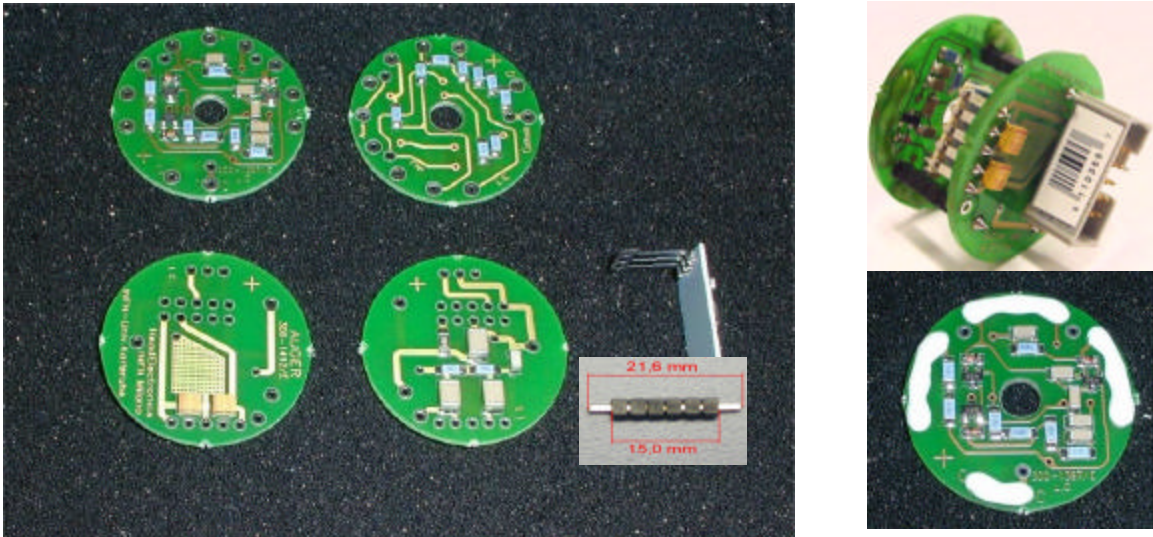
The Base PCB (upper side), the driver PCB (lower side), the hybrid driver circuit and the interboard pins. The soldering pads of the Base PCB are protected against oxidation by a Flex Mask, which is removed just before they are mounted onto the PMTs. The central hole serves to accommodate a plastic piece used to reinforce the mechanical strength of the PMT+HE assembly. At the upper-right corner: a finished HE unit.
